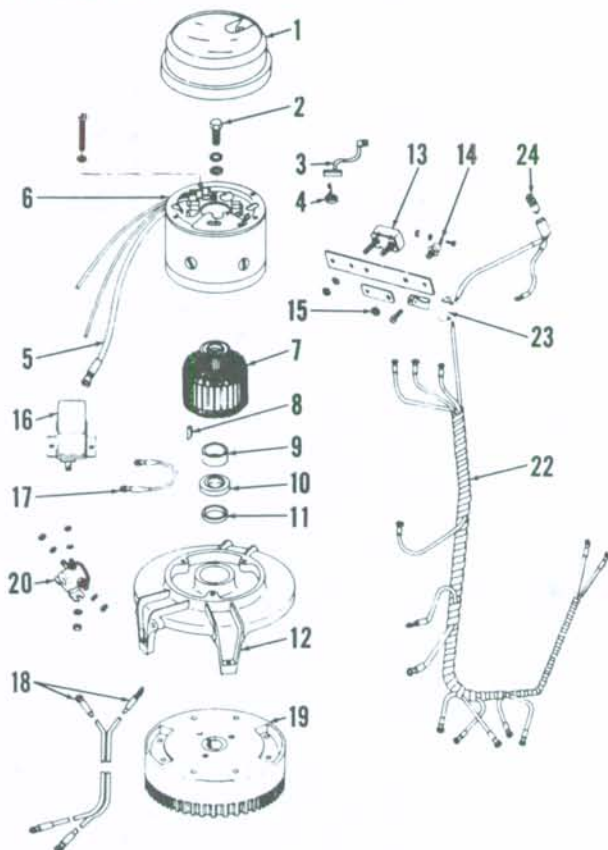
Exploded view of electric starter-generator assembly for 9 hp "Autoelectric" models.
